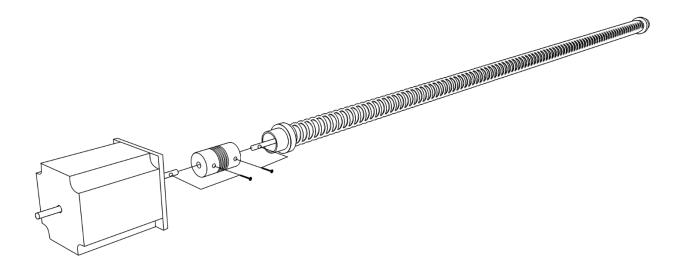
(THE MOTOR, THREADED ROD CONNECTION)
